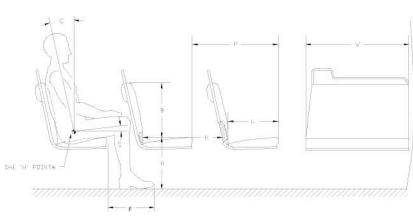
Seating Dimensions and Standard Configuration Seat dimensions for the various seating arrangements shall have the dimensions as follows (refer to Figure 6):
